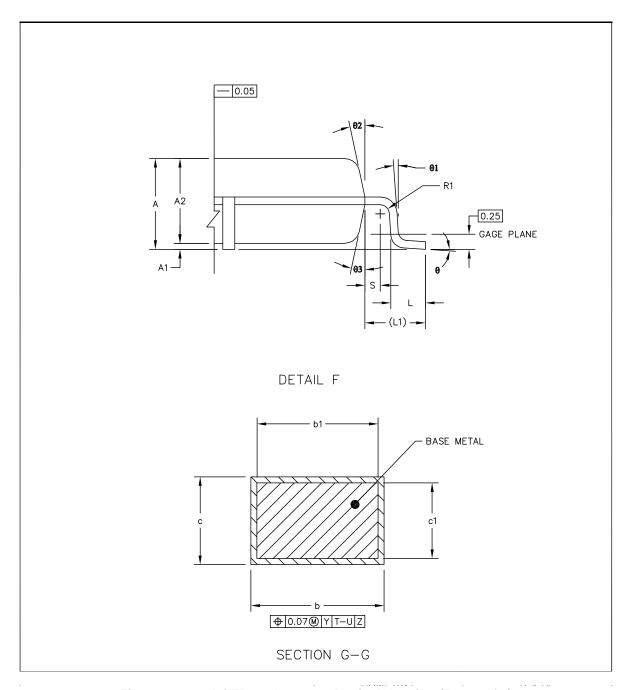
176 LQFP package mechanical drawing (Part 2 of 3)
